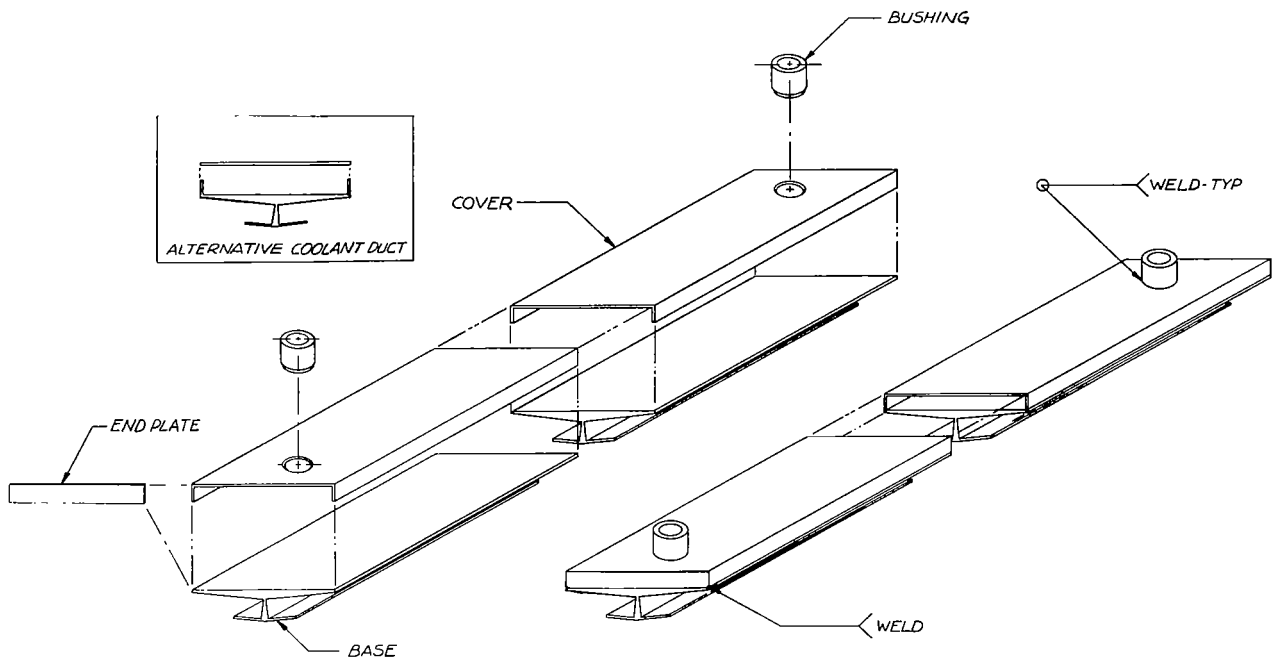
Primary Coolant Duct Fabrication and Assembly (Step 1)
